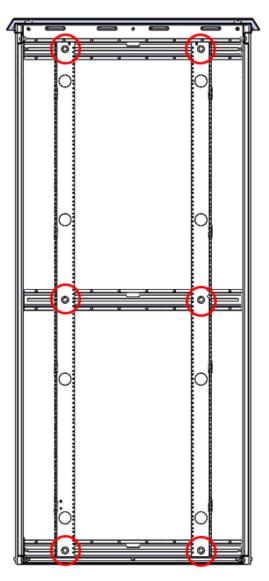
ENCLOSURE RACK SUPPORT MOUNTING BOLTS
